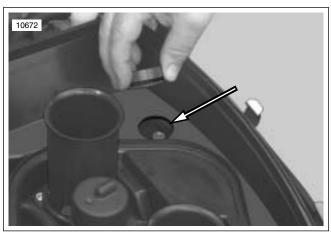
Air Bleed Plug @ 9-11 Nm (80-97 in-lbs)
